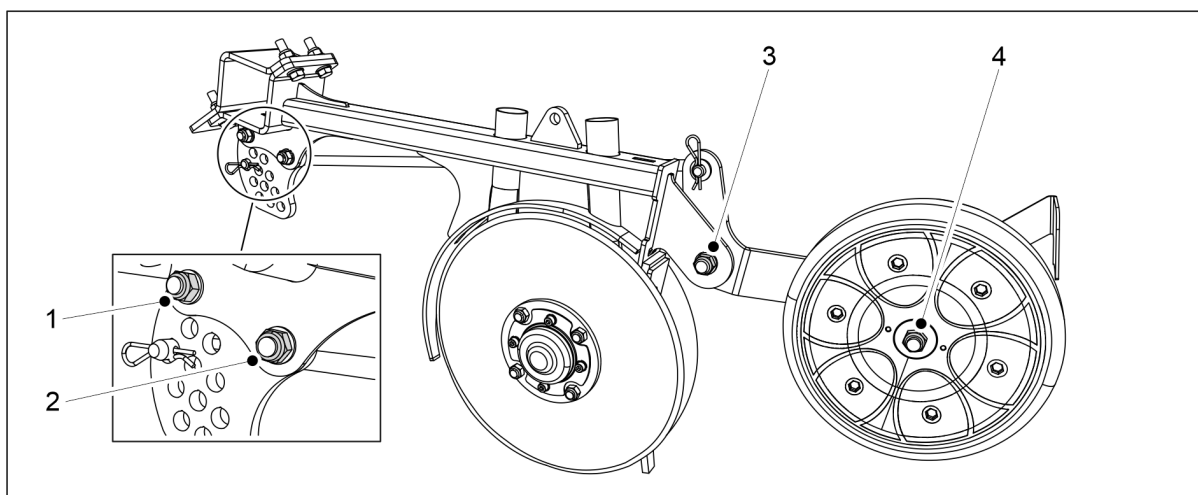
218. Bolts of the coulters covering wheel and depth adjustment
